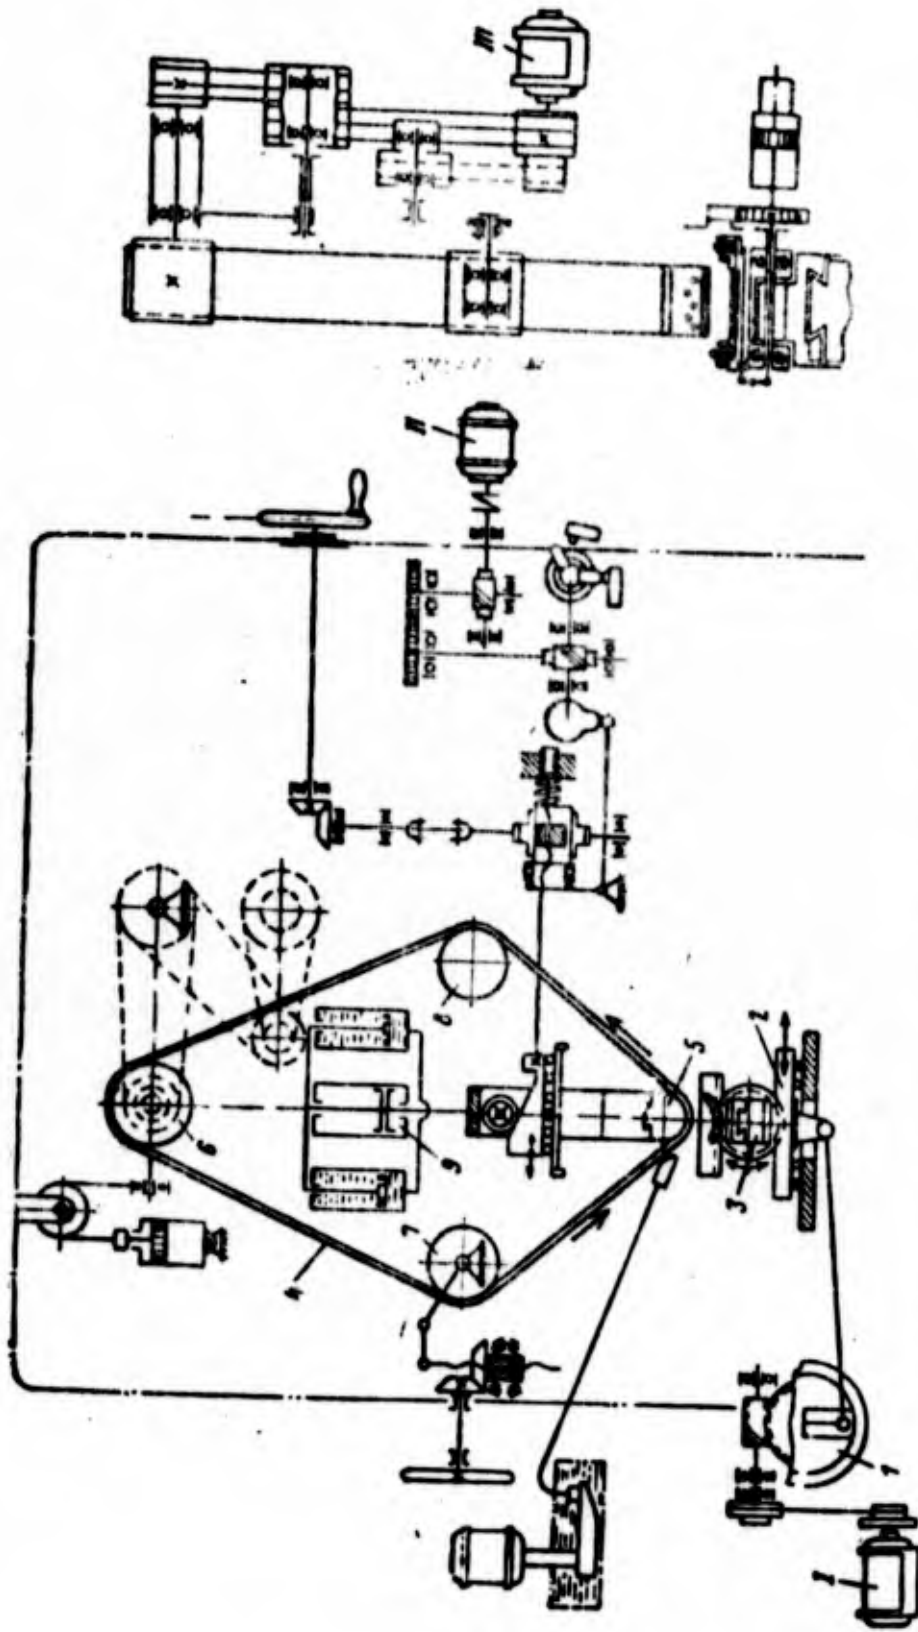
Schematic of machine KhSh-185M. I) electric motor for drive of feed mechanism; II) electric motor for automatic feeding of master form; III) electric motor for drive of abrasive belt.
